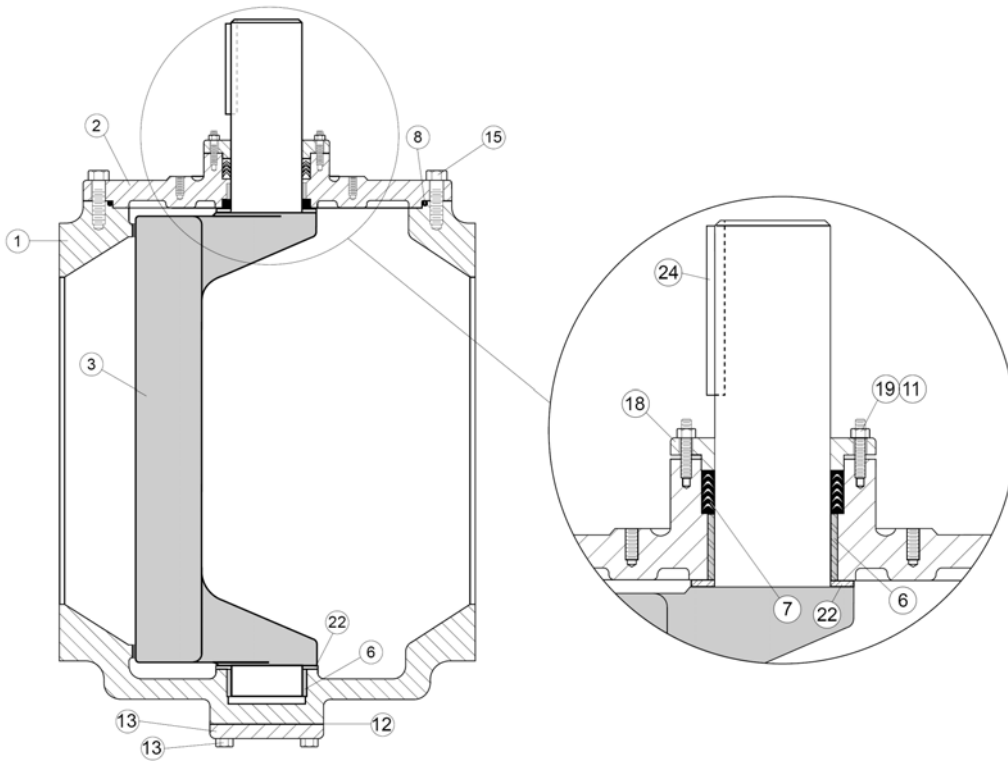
STANDARD PLUG VALVE CONSTRUCTION
